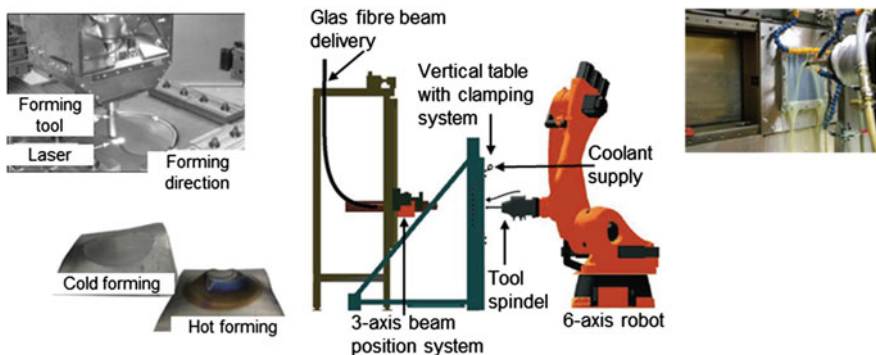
Laser assisted single point incremental forming of sheet metal parts
